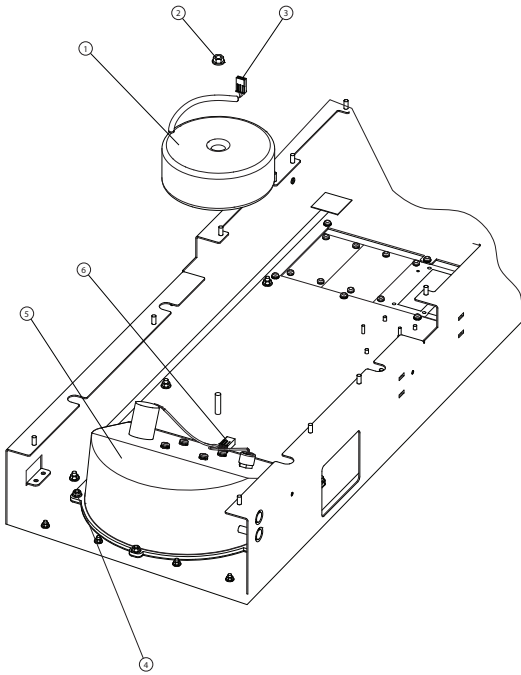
Fan Transformer and Heatsink Fan Assembly
